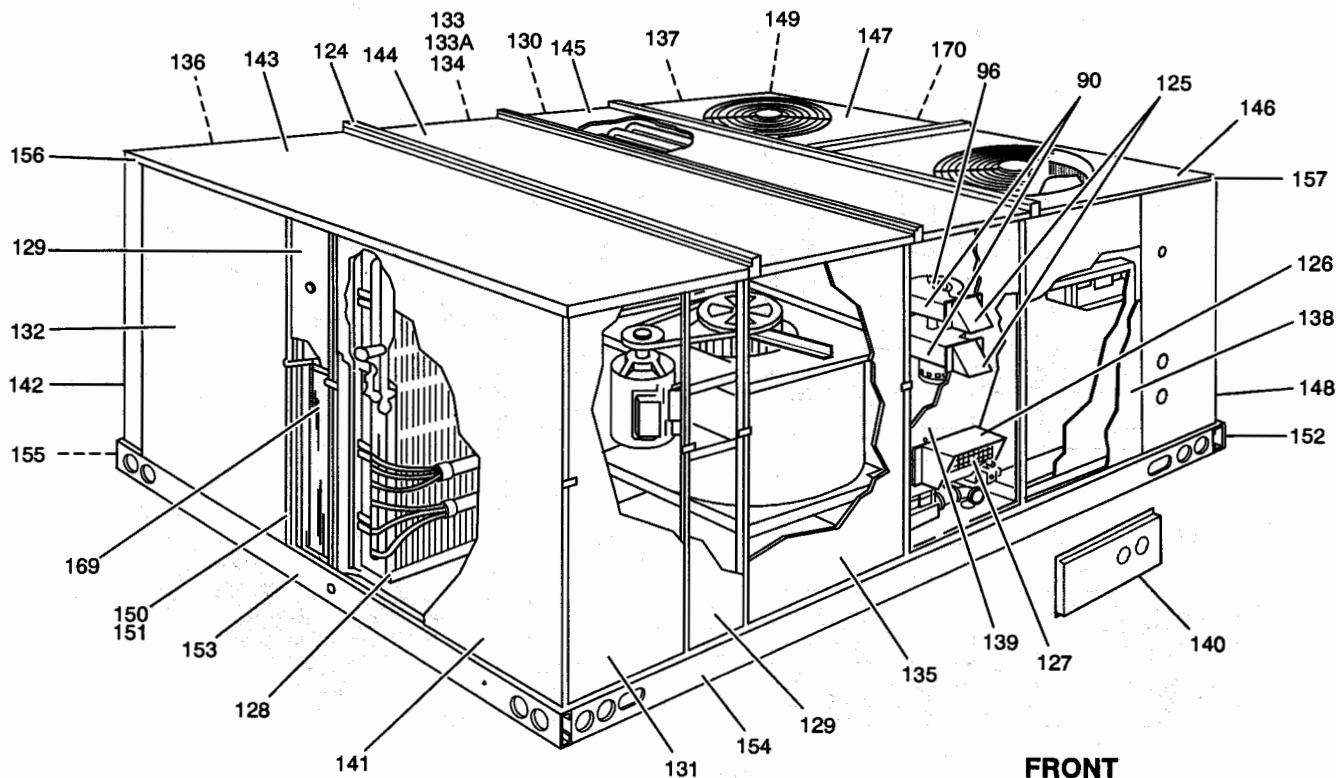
SINGLE PACKAGE GAS / ELECTRIC UNIT
